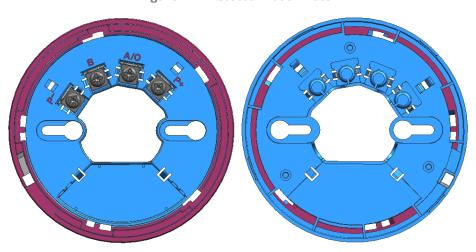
Detector Base 2D Drawings (Top Side - Left, Bottom Side - Right)
